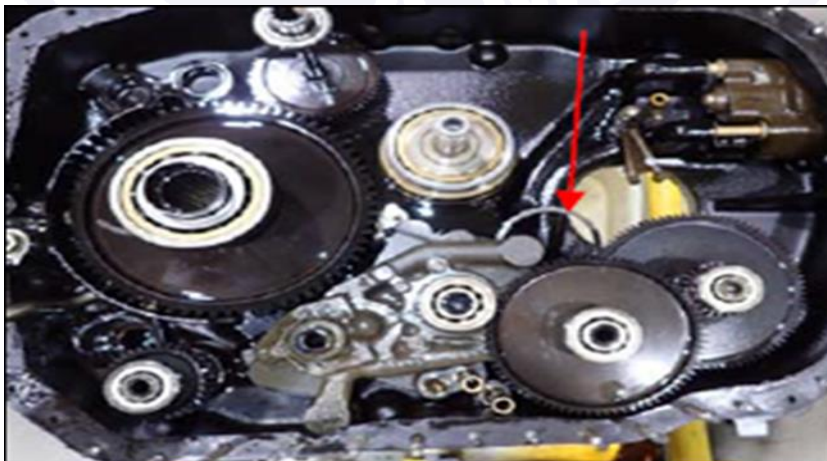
Bearing Retaining Ring n° 2 found inside the gearbox.
